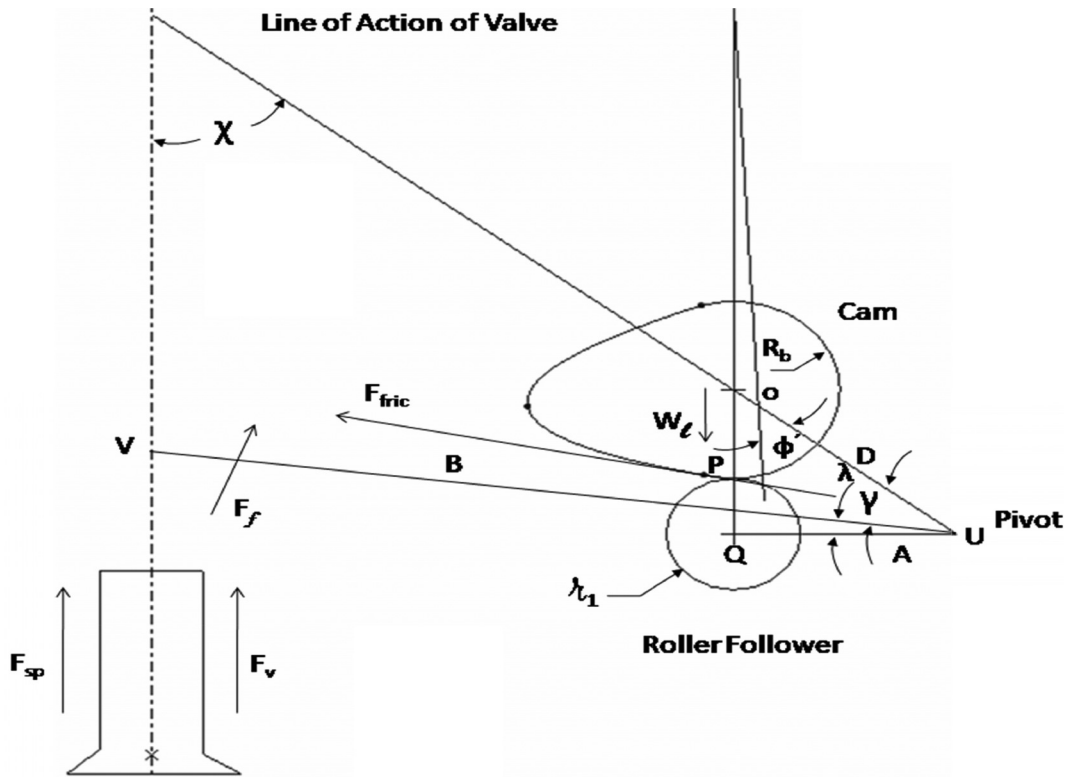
Basic geometry and forces acting in end pivoted roller finger follower valve train.
